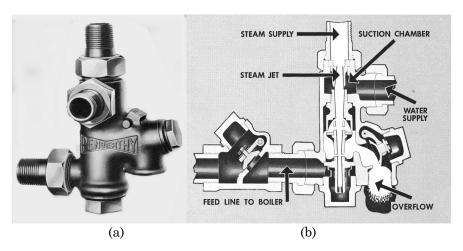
Injector: (a) external appearance; (b) working parts. (Courtesy Penberthy Division of Stanwich Industries, Inc.)
